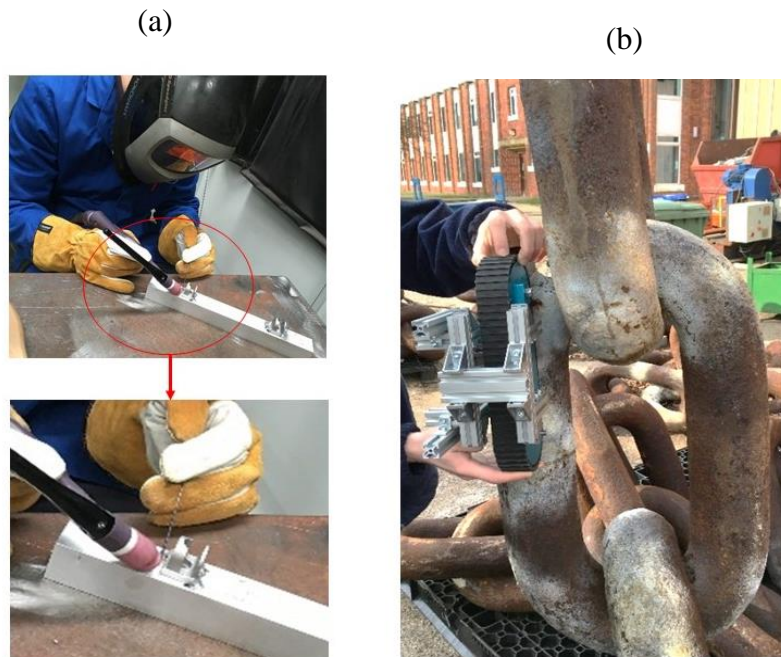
(a) TIG welding procedure for attachment; (b) tracked-wheel testing on the chain surface
